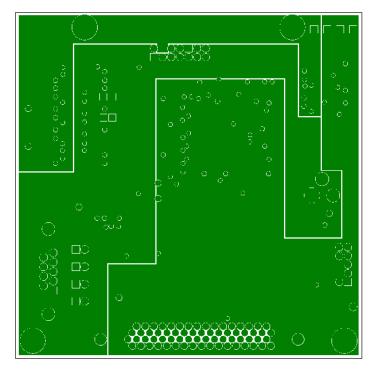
Debug Board: Middle Layer 2, Supply Plane
